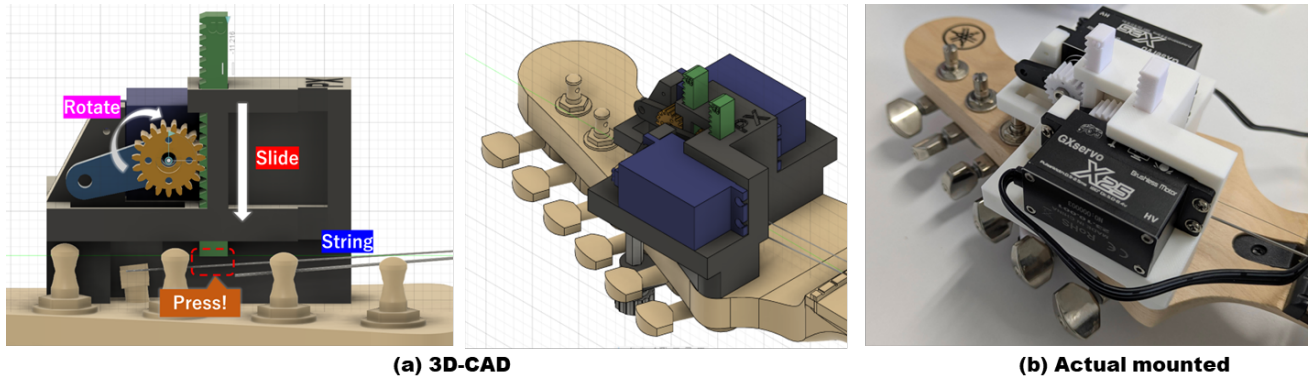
Robo-Bend mechanism. Left: CAD model of the rack-and-pinion drive pushing the string. Right: Prototype mounted on the headstock.
